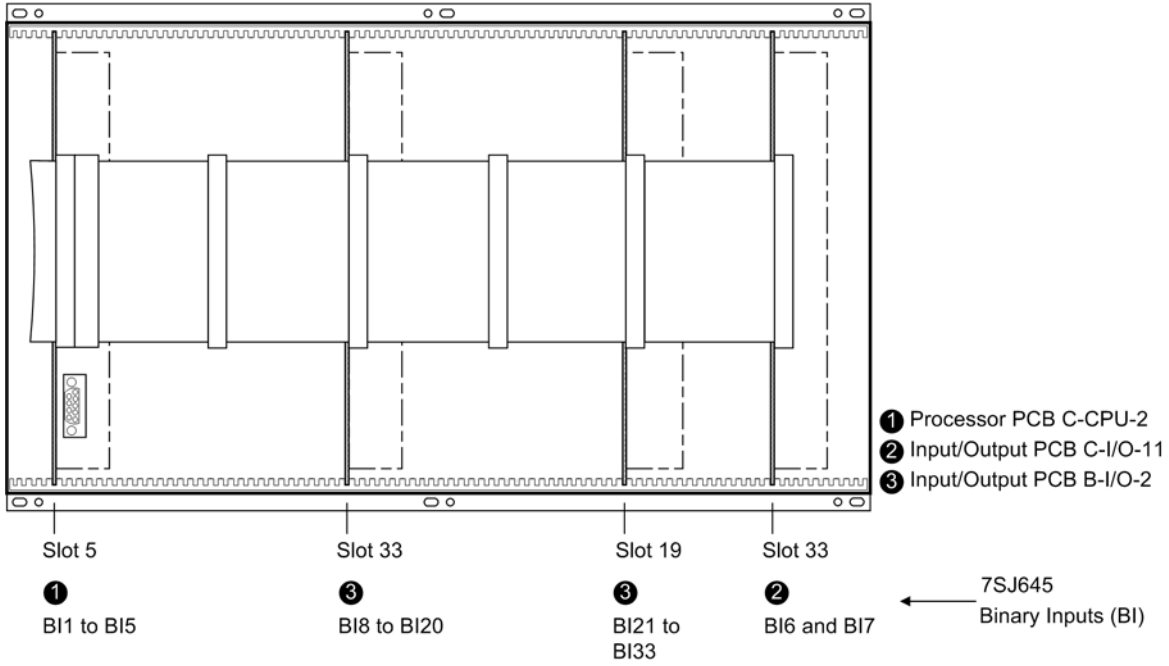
Front view of the 7SJ645 with housing size 1/1 after removal of the front cover (simplified and scaled down)
